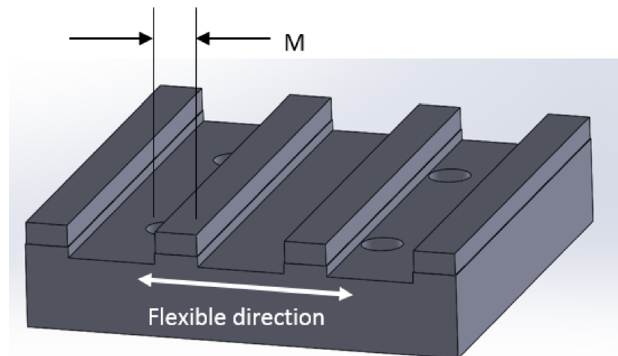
The workpiece included four ribs that were initially machined to the same dimensions. The $\{5 \text{ mm axial depth, } 2 \text{ mm radial depth}\}$ cuts were then performed on one edge at a different spindle speed for each rib. The SLE was calculated as the difference between the commanded, C , and measured, M , rib widths. The flexible direction for the flexure is identified.
